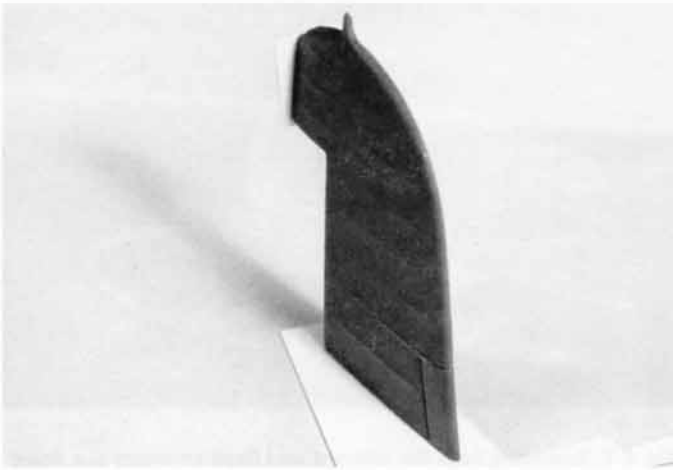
The corresponding rudder for this Corsair will be sealed using a combination of sheet stock and resin. Here oversize sheet stock was glued to the openings. Once the glue is dry, the sheet stock will be cut down and shaped.
